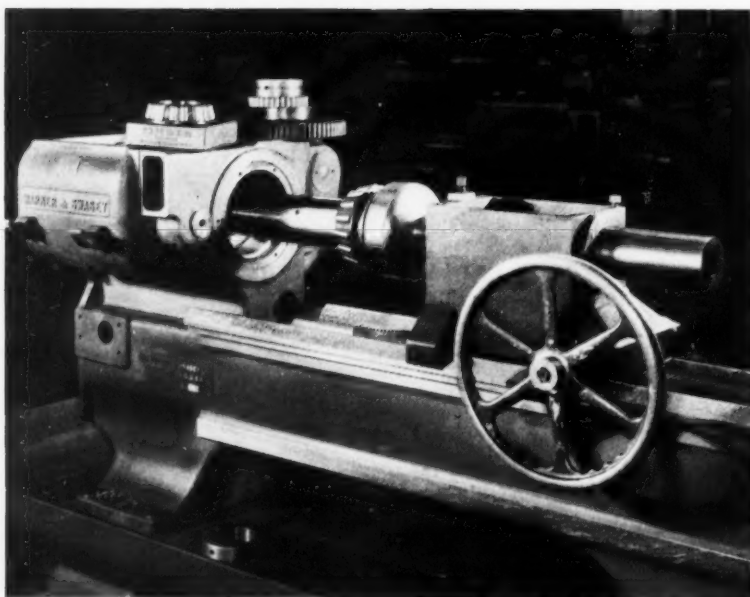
Assembly Fixture Used for Setting the Finished Spindle into the Headstock
